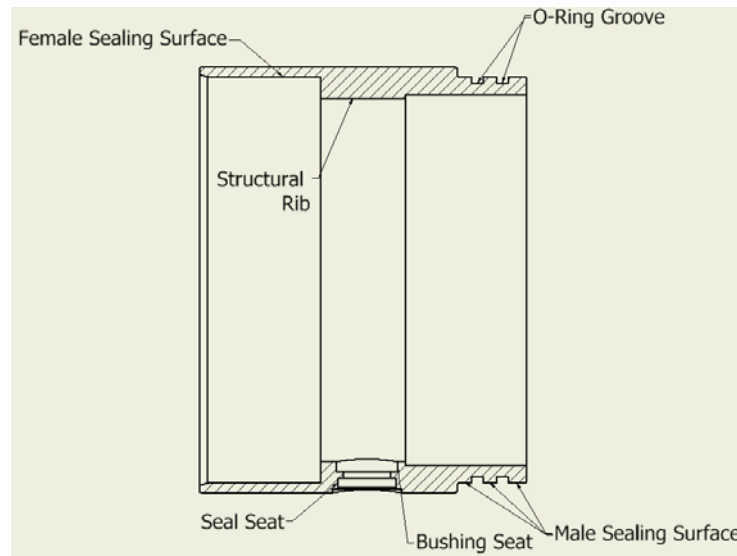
SPU Tube Section Cutaway View. The finalized tube section has four main features. Two end glands to allow interfacing with adjacent tube sections. A rib for structural support and a thruster port where the lower housing intersects the tube.
